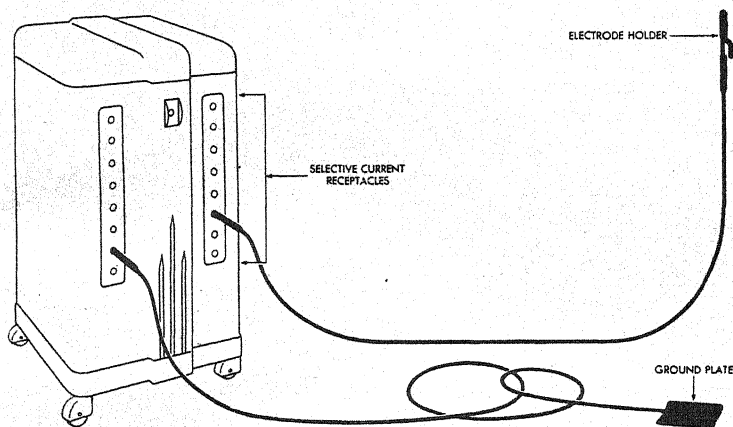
Typical transformer-type alternating current arc-welding machine (cracker box).
